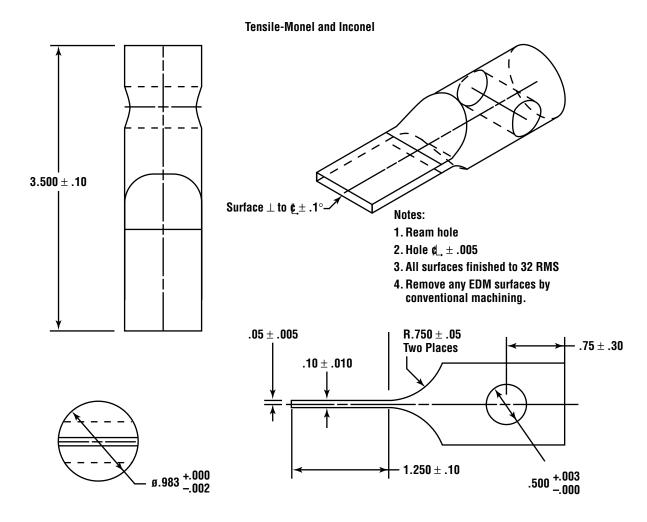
Half tensile specimen for evaluating braze alloy and joint metal.
